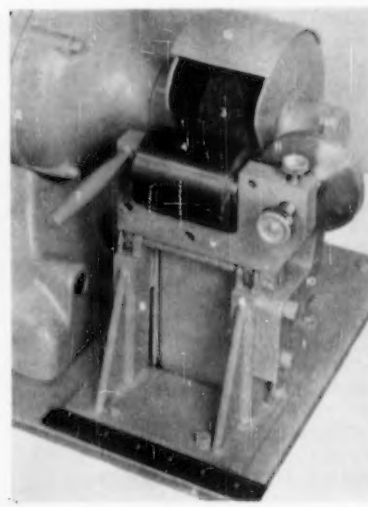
Another View of the Grinding Machine for Preparing Strip Specimens of Flexible Materials.
